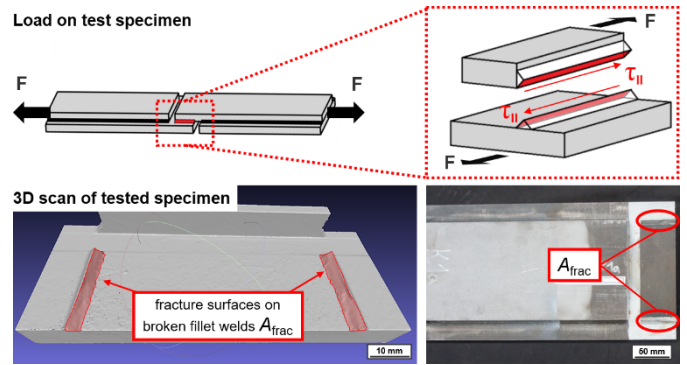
Measurement of fracture surfaces on broken longitudinal fillet welds for determination of shear stresses
